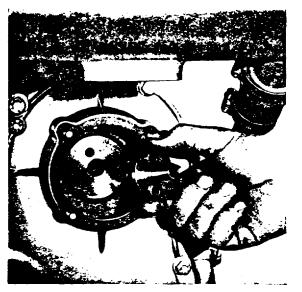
Removal of Fuel Pump Gear Setscrews and Tachometer Drive Shaft.
